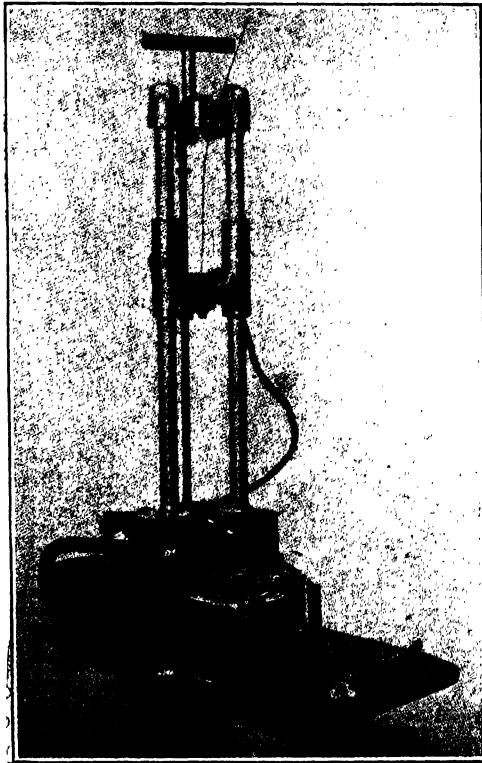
GRAVITATIONAL TYPE OF ELECTRO-PERCUSSIVE WELDING TOOL.
